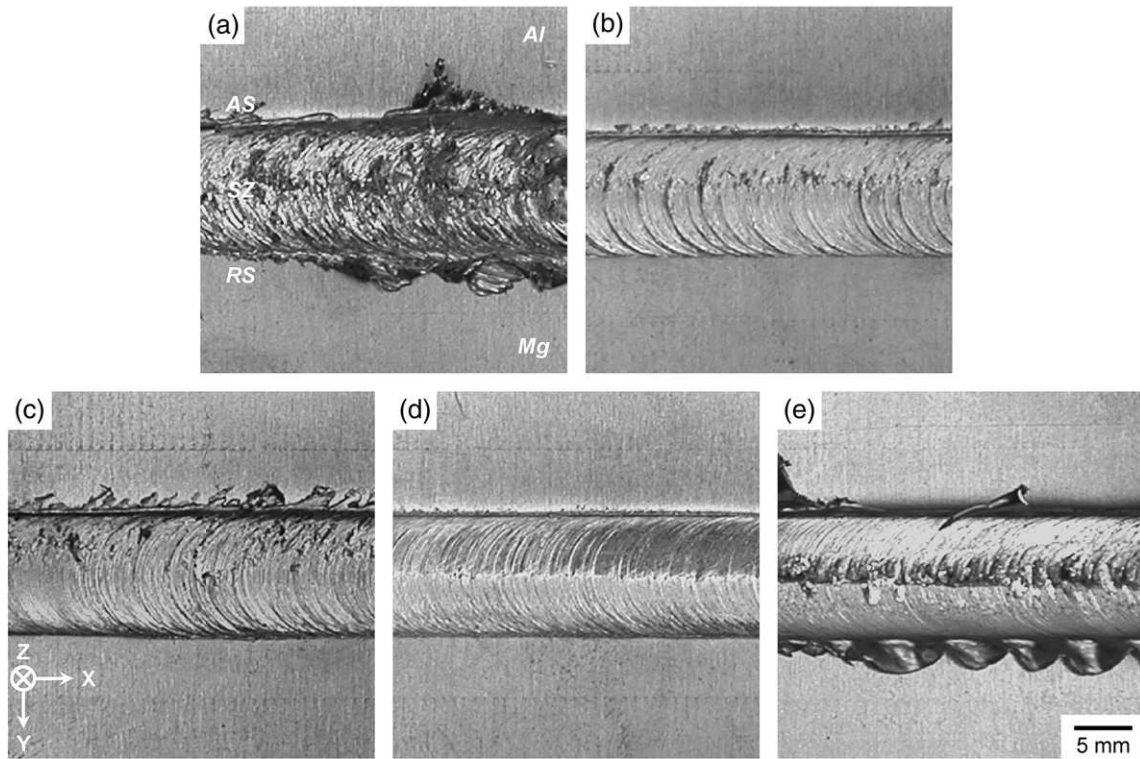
Surface appearances of the plates friction-stir-welded with tool rotation speeds of (a) 800, (b) 1000, (c) 1200, (d) 1400, and (e) 1600 rpm. The friction-stir-welded zone, the advancing side, and the retreating side are labeled SZ, AS, and RS, respectively. X, Z, and Y represent the tool traverse direction, the tool rotation axis direction, and the rolling direction of base metals, respectively.
